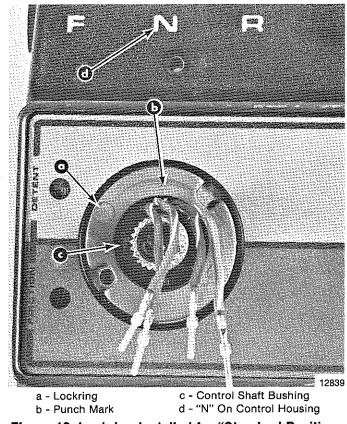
Lockring Installed for "Standard Positioning" of Control Handle
